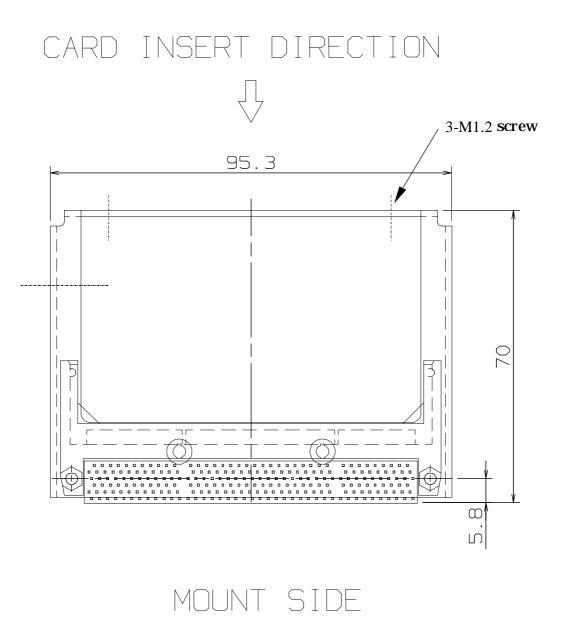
Horizontal Dimension When Card Stopper (SEK6676P01) is Mounted
